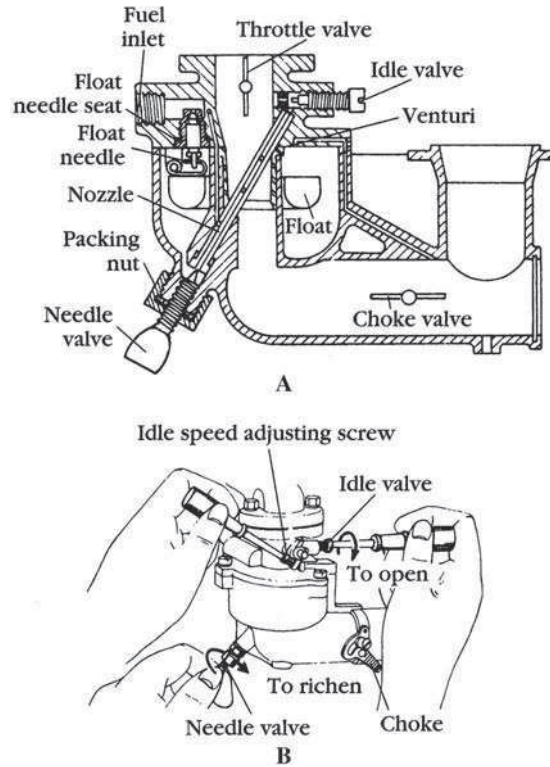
Two-piece Flo-Jet in sectional view (A). The part that Briggs calls a “needle valve” is better known as the main, or high-speed, mixture-control screw. The “idle valve” is the idle, or low-speed, mixture-control screw. The locations of these two mixture-control screws varies with carburetor type but the idle-mixture screw is always the one closer to the engine. Because these screws control fuel delivery, backing them out of their jets enriches the mixture (B). Occasionally, you might encounter a foreign or vintage American carburetor that employs adjustable air jets, distinguished by the rounded needle tips of the adjustment screws. Backing out an air screw leans the mixture. Briggs & Stratton Corp.
